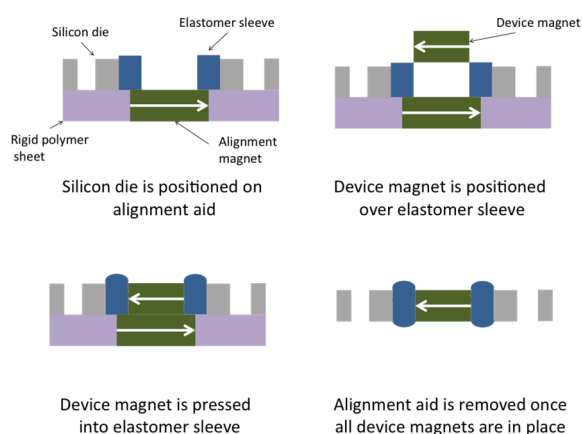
A schematic view of the magnet assembly process as well as the assembly jig used for the microrobots.
